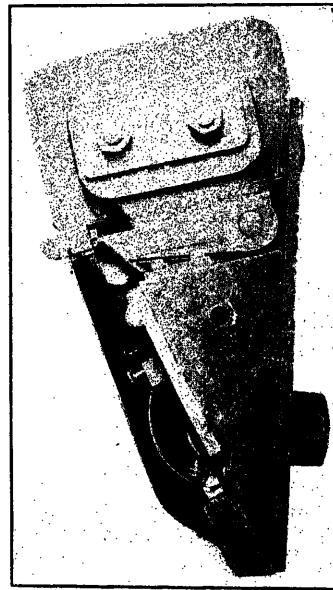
RADIAL BRUSH HOLDER UNIT OUTER END INSULATION REMOVED
